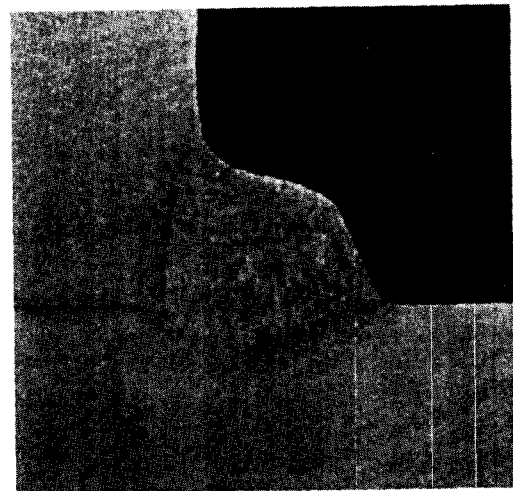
(c) Photograph of weld bead with excess convexity (welding speed=7 (mm/sec), src voltage=26 (V), welding current=250 (A))
